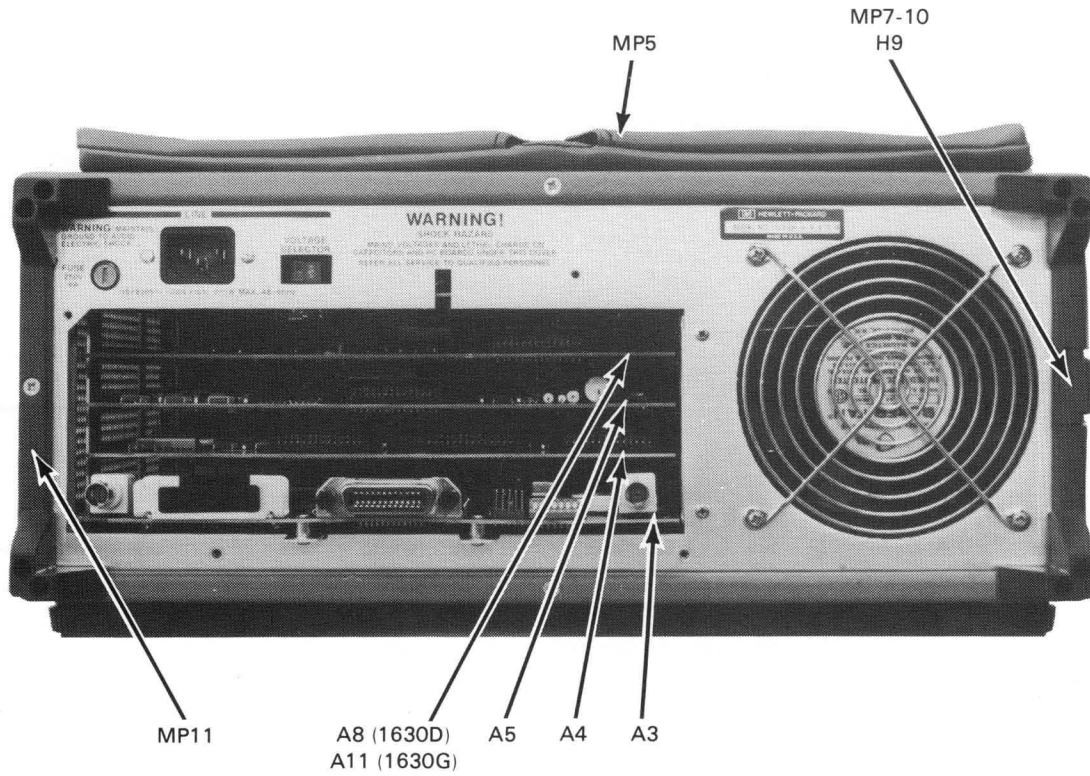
Mainframe Mechanical Parts Locations (sheet 2 of 4)
